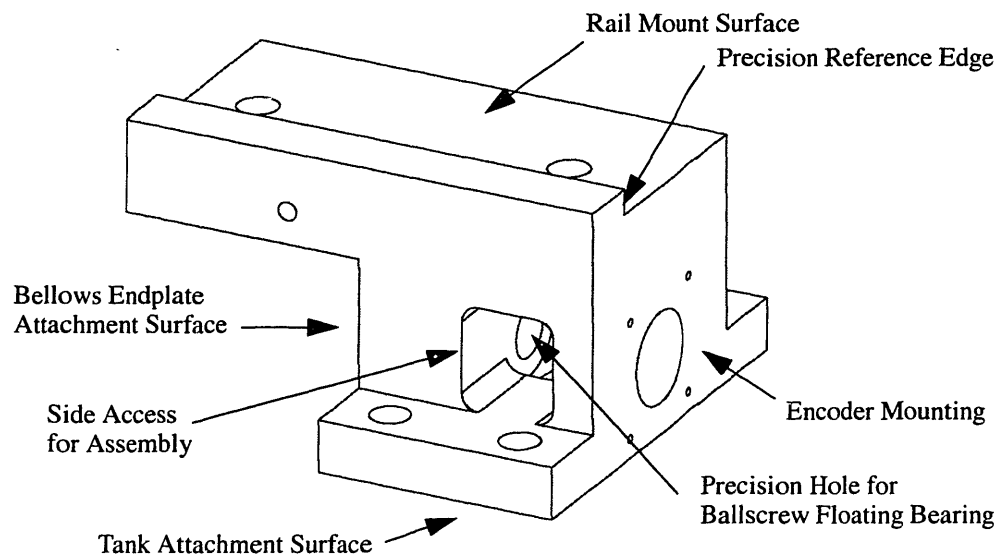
Y-Axis Encoder Mount Bearing Block
